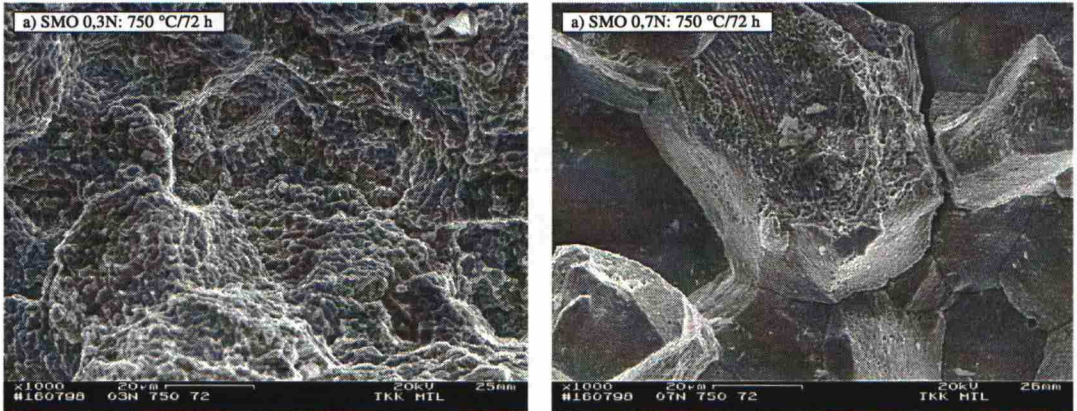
Fracture surfaces of tensile samples of the studied steels with 0,3 wt-%N a) and 0,7 wt-%N b) isothermally annealed at 750 °C for 72 h.
